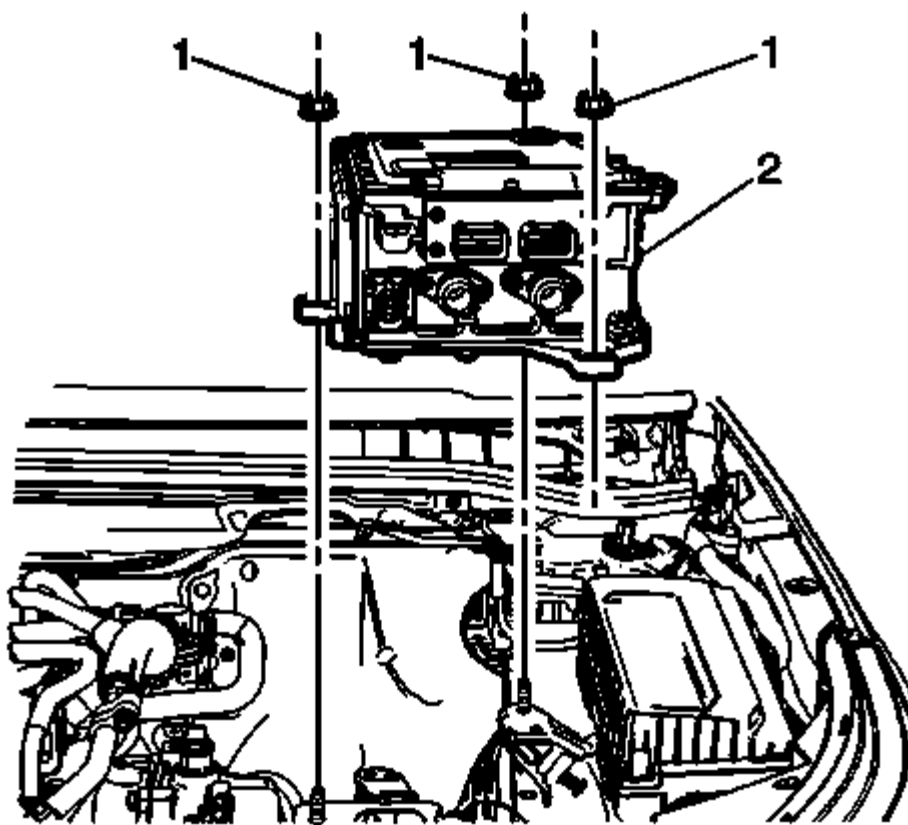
Power Inverter Fasteners And Drive Motor Power Inverter Control Module
